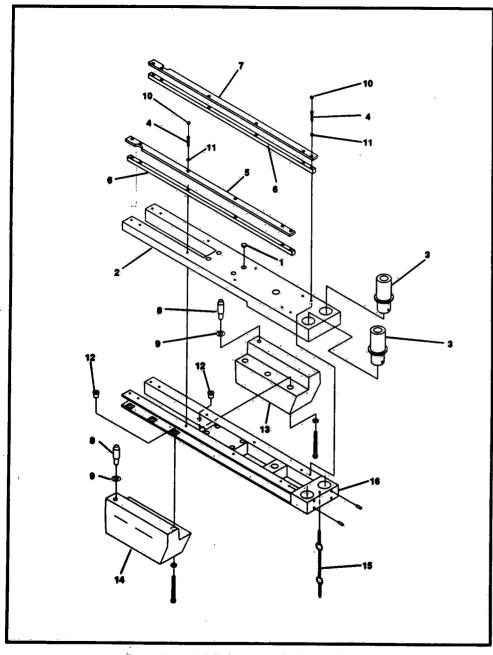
LONGITUDINAL SUPPORT ASSEMBLY.
